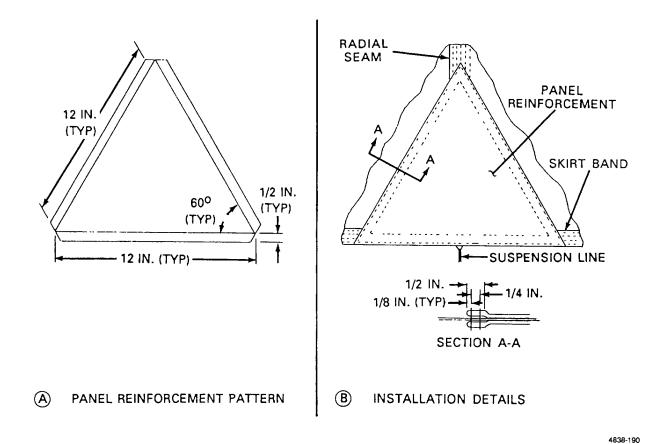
Cutter Bracket Panel Reinforcement Replacement Details.
